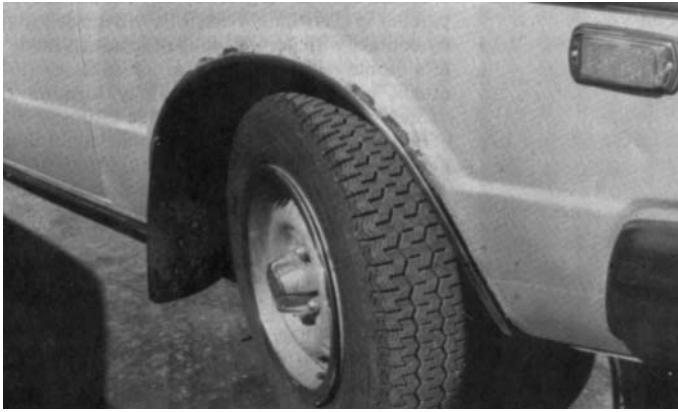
Galvanic corrosion of painted steel auto body panel in contact with stainless steel wheel opening molding (Baboian)⁵
